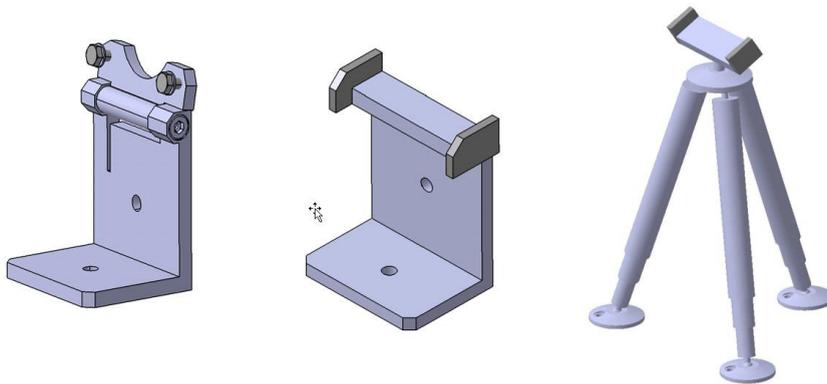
Supporting and fixing elements for positioning the standard within machine-tool volume.
